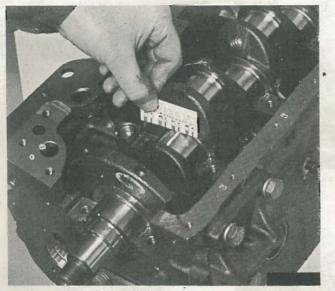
Measuring a main bearing running clearance using Plastigage filament (Sec 35)
